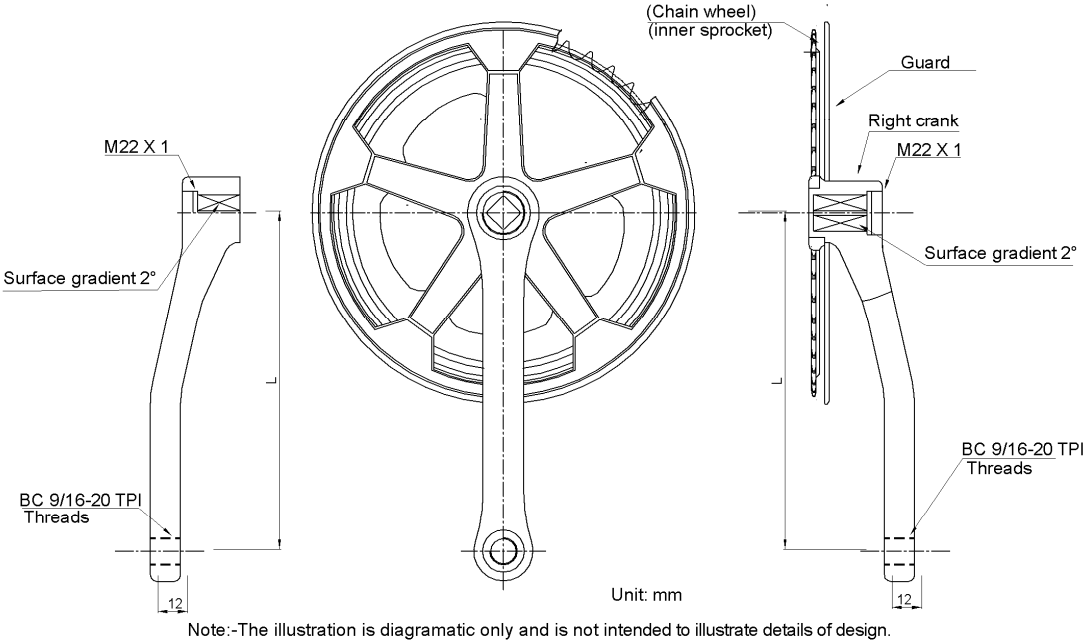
Single Speed - Left Crank & Right Crank with Chain Wheel - Cotter-less Type
